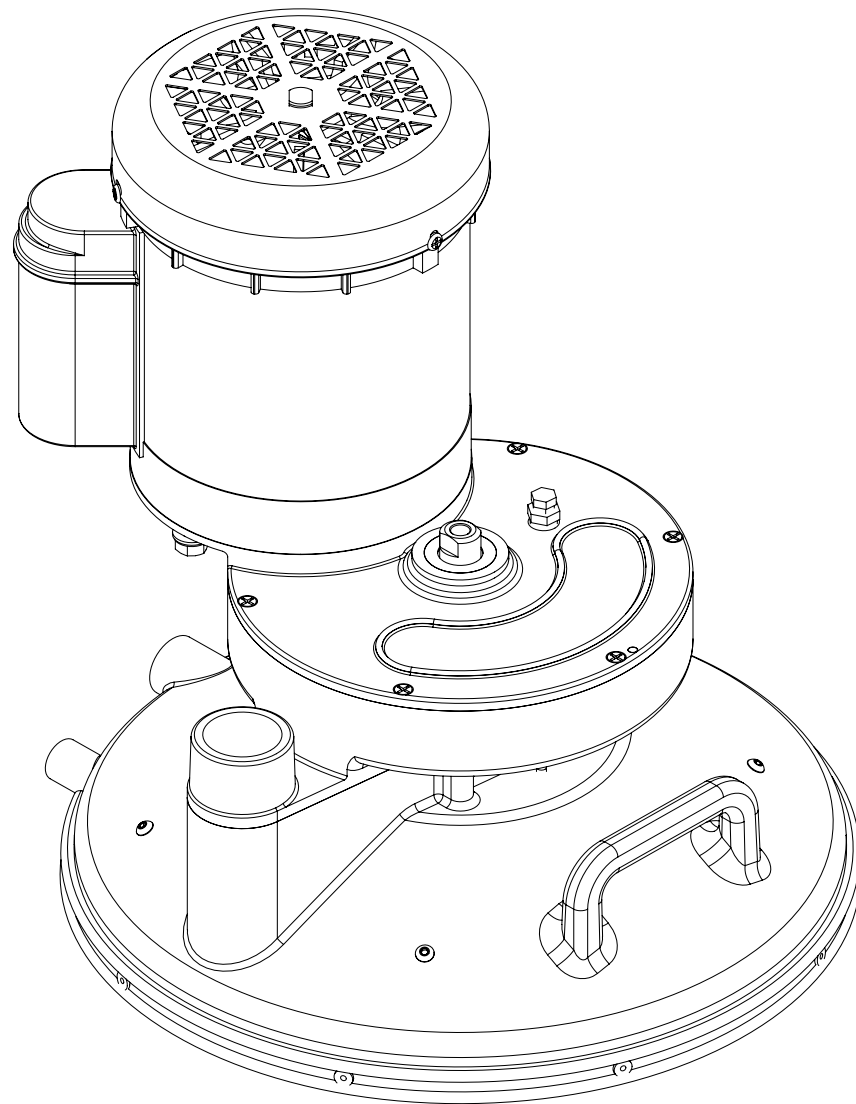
Base and Drive Train Assembly - View 1 of 2
